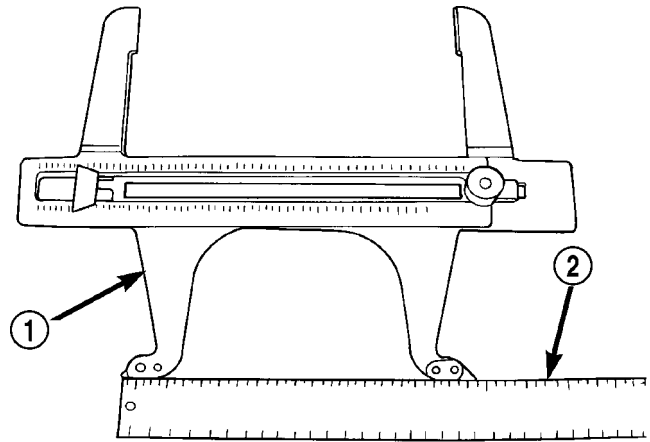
READING PARK BRAKE DRUM DIAMETER
